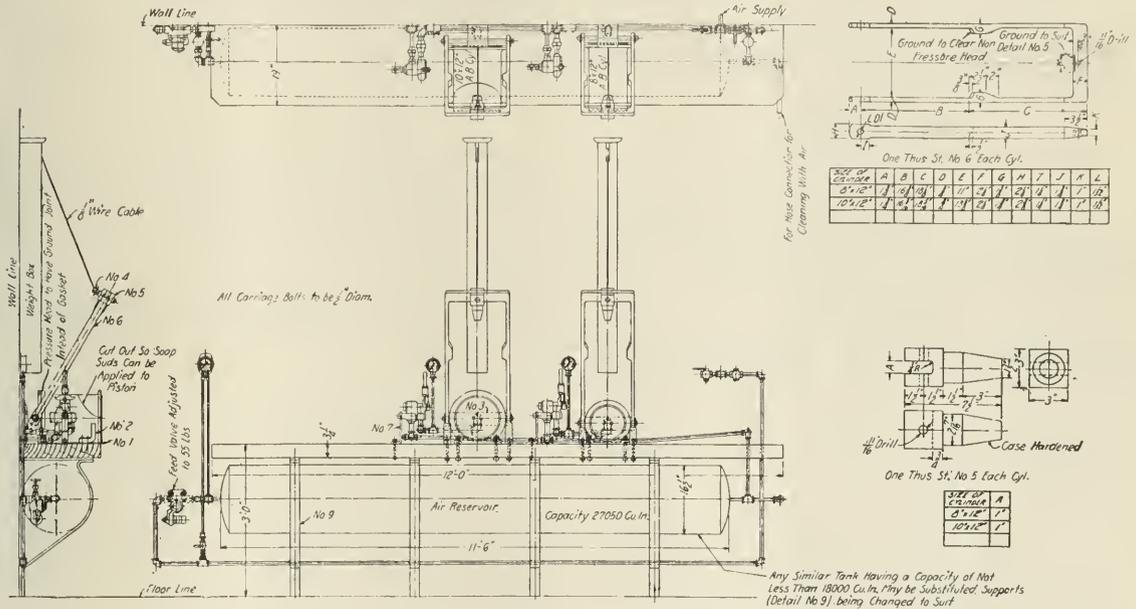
Brake Cylinder Packing Lever Test Rack
